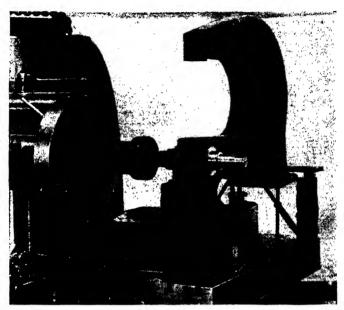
Turning the trunnions of a riveting machine frame with a hollow mill.
